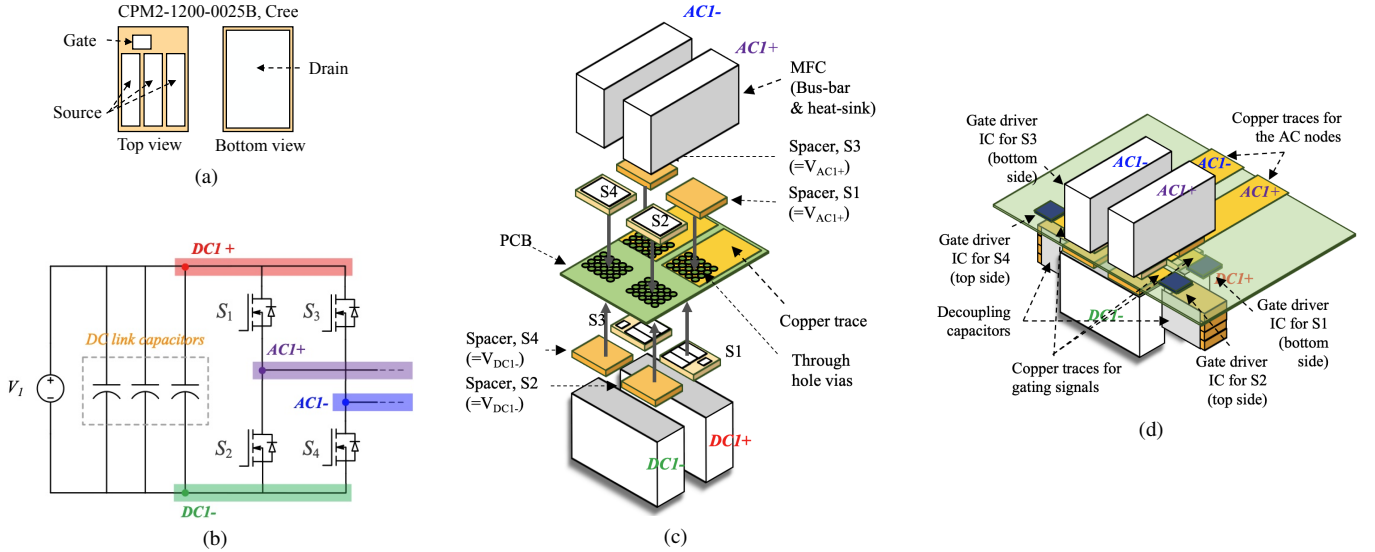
Illustration of the switch assembly of the converter [30]. (a) Cartoon image of a typical bare-die MOSFET highlighting the gate (G), source (S) and drain (S) pads. (b) Schematic of one full-bridge. (c) Exploded view of the full-bridge assembly. Bare-die switches of each half-bridge are placed in diagonally opposite sides of the PCB with the G and S pads facing the PCB. Connections between the switches of each half-bridge is done using PCB vias, thermo-electrically conducting spacers and multi-functional components (MFCs) which serve as both bus-bars and heat sinks. (d) Assembled view showing location of the de-link decoupling capacitors and connections via PCB traces to the transformer and gate driver circuitries. The arrangement ensures improved high-frequency electrical performance (due to low loop inductances) and improved thermal improvements (due to quasi double-sided cooling and absence of thermal interface material) in an ultra-compact volume.
